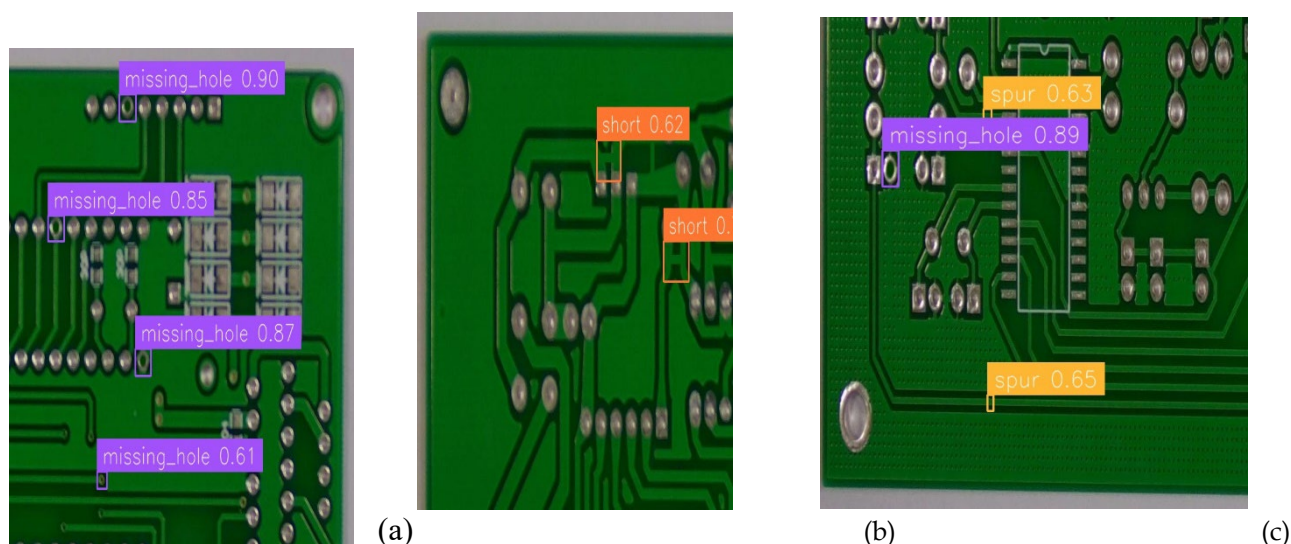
PCB defect images: (a) Missing Hole (b) Short Circuit (c) Spurious Copper
